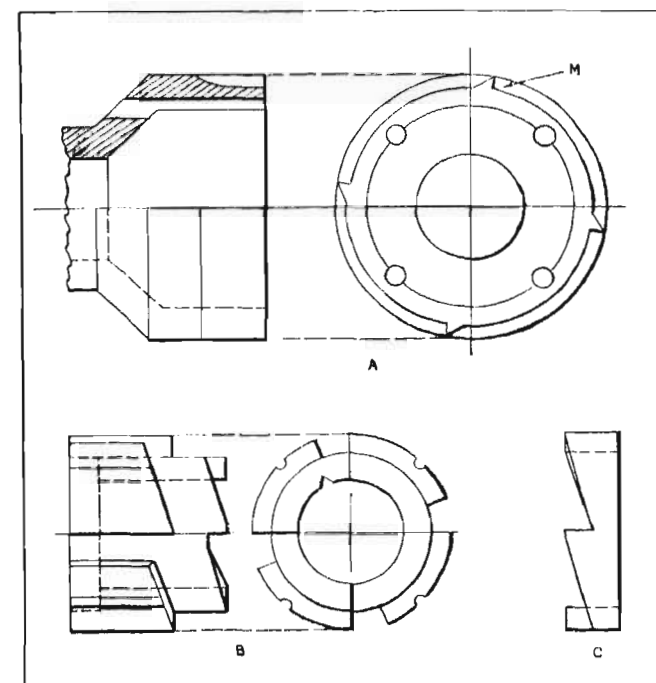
Detail Views of Parts A, B and C, Fig. 5
